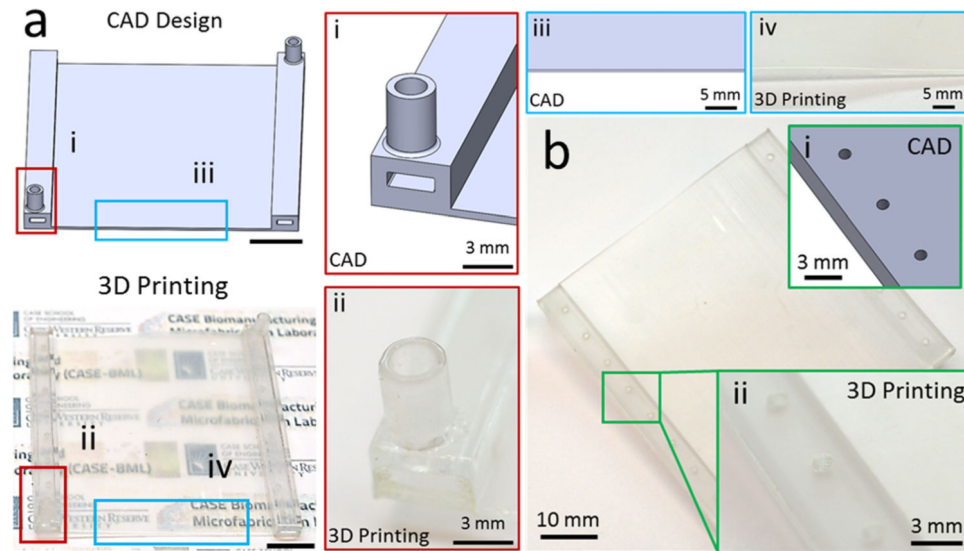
Fabrication of the microfluidic device using 3D printing. The microfluidic devices fabricated with PolyJet printing are compared to the CAD design for performance evaluation. (a) PolyJet printing allowed fabrication of transparent microfluidic devices, while closely matching to the CAD design for (i and ii) inlet and outlet with clear flow pathways. (iii and iv) Moreover, edges of the base layer were clear and sharp as in the CAD design. Scale bars represent 10 mm length. (b) Surface evaluation of printed device in comparison to CAD design. (i and ii) Bottom layer of the 3D printed microfluidic device provided a smooth surface finishing.
